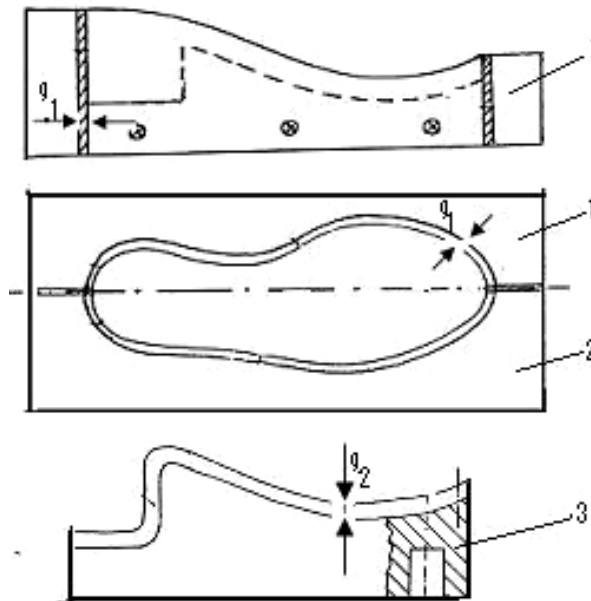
Cavity diversification by successive milling of the lateral jaws and remanufacturing the die
